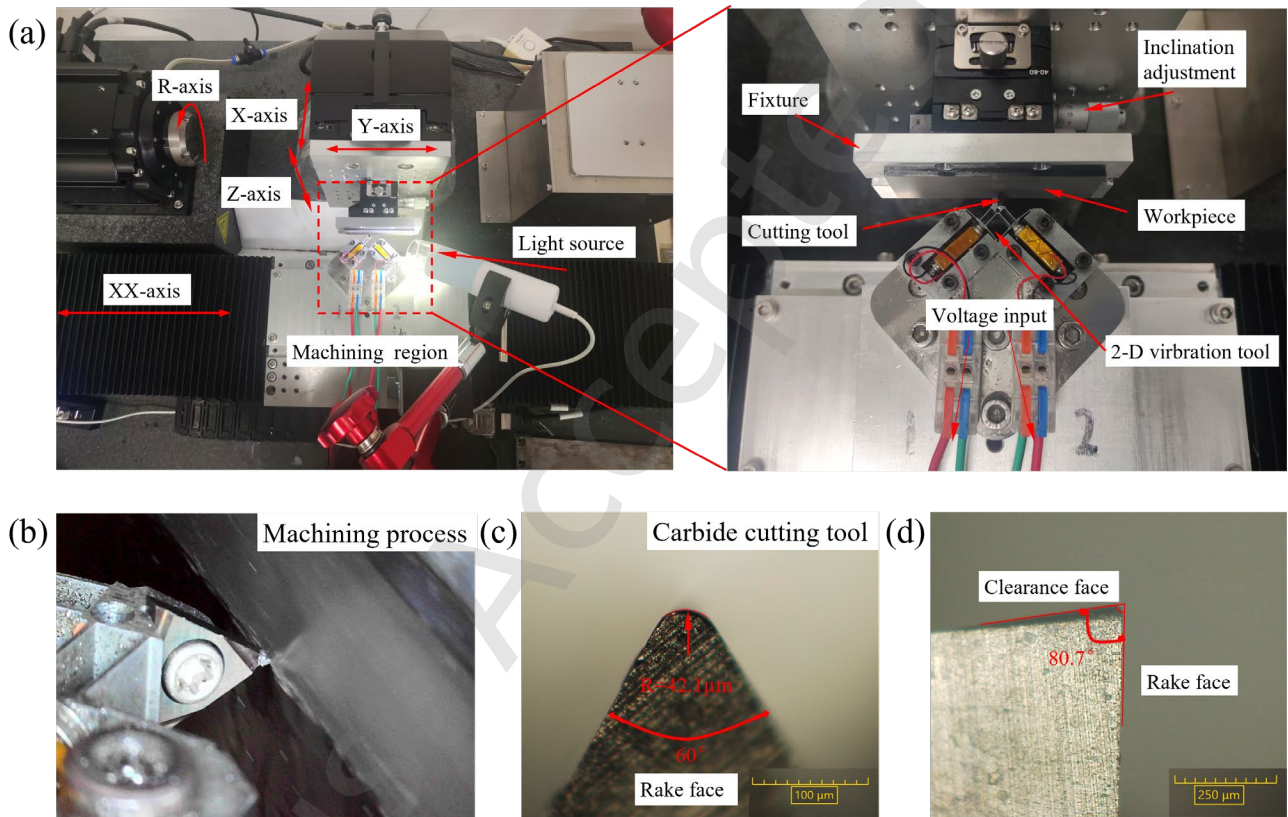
(a) PVMT experimental device. (b) Photograph of PVMT processing. (c)&(d) Photograph of cutting tool.
